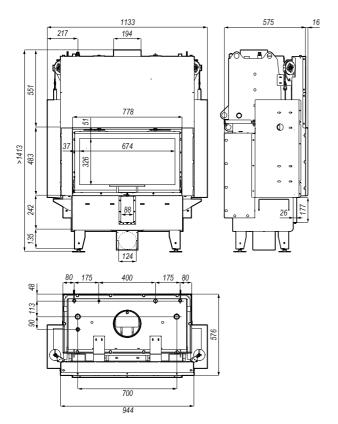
Projections with dimensions of DEFRO HOME RIVA SM BP fireplace insert.
